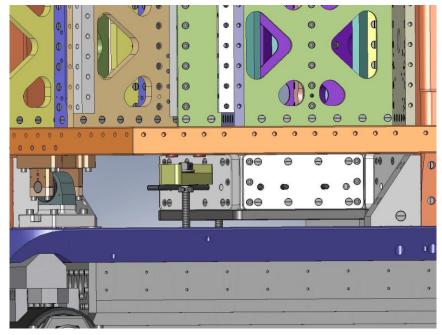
Set the starting length for the ACME Screw, leaving 4" between the bottom of the shaft collar and the top of the Pull-Down Base. The Spring Pull-Down Assembly must pull through 3.5" to flatten the Springs. The ACME Screw is not fully engaged in the Pull-Down Nut during the first .5" of travel, but the tension is small over this range.
